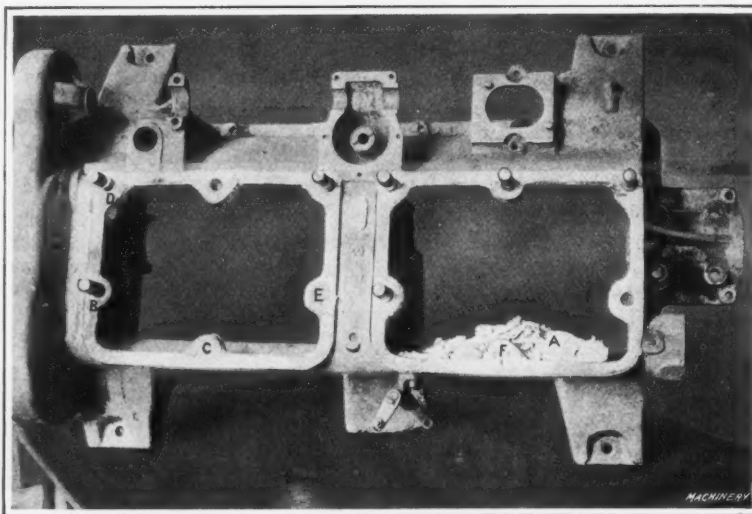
Aluminum Crank-case showing Method of preventing Cracks in Welding
